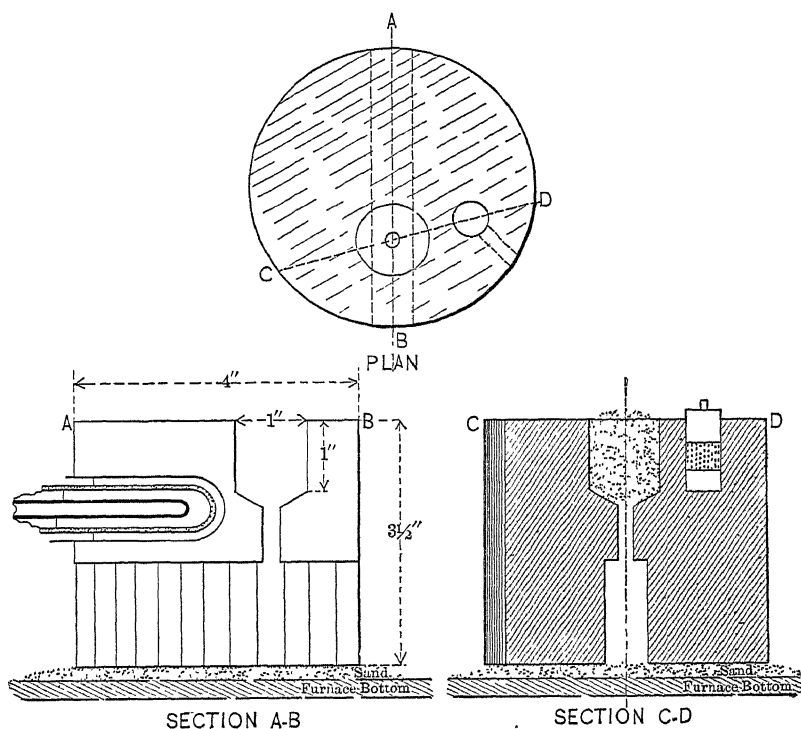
SLAG-TESTER. PLAN AND SECTIONS.
